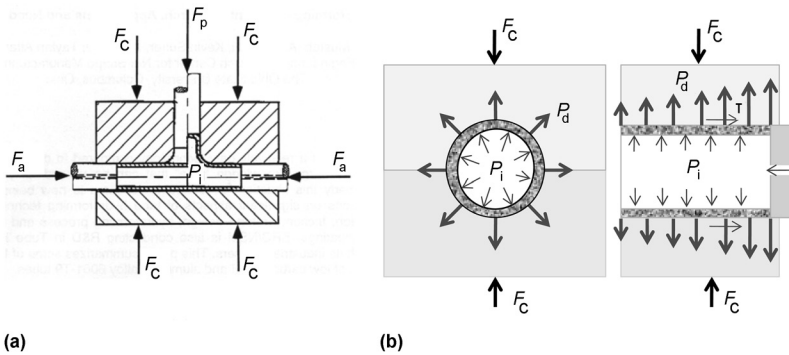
Forces acting on a T-shape tube hydroforming die
